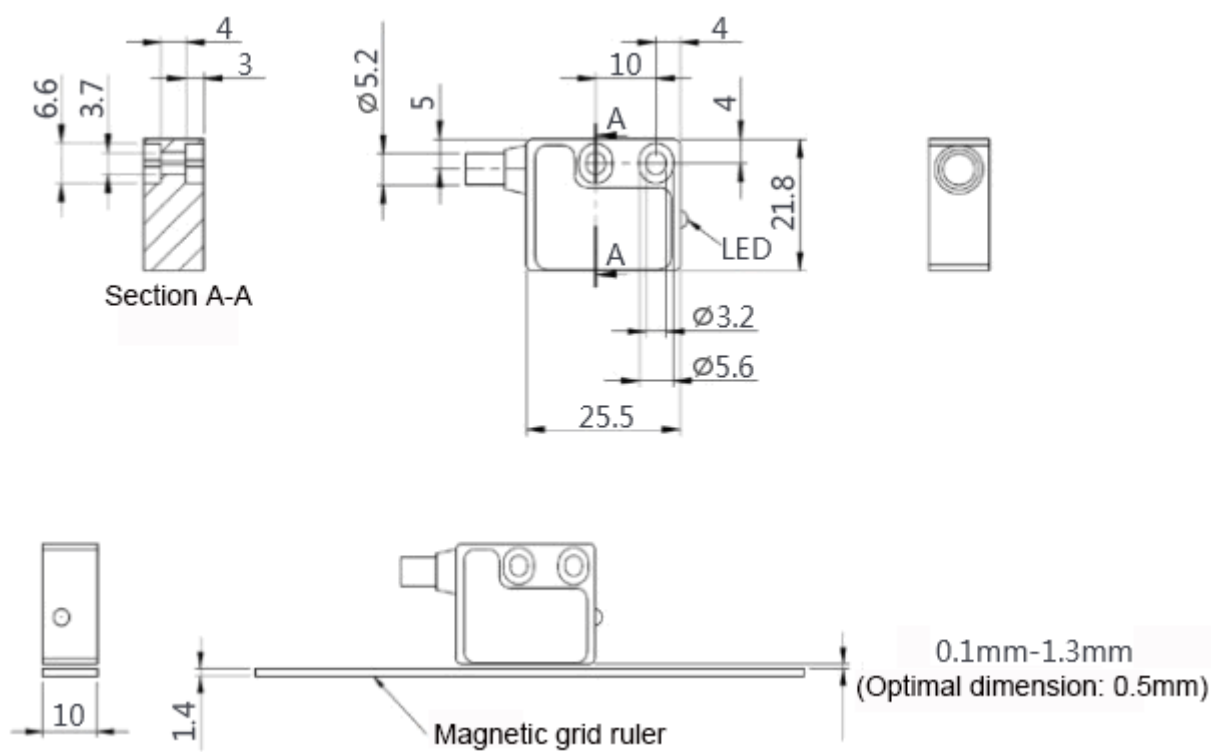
Dimensional drawing of MRH20 series magnetic grid linear encoder
